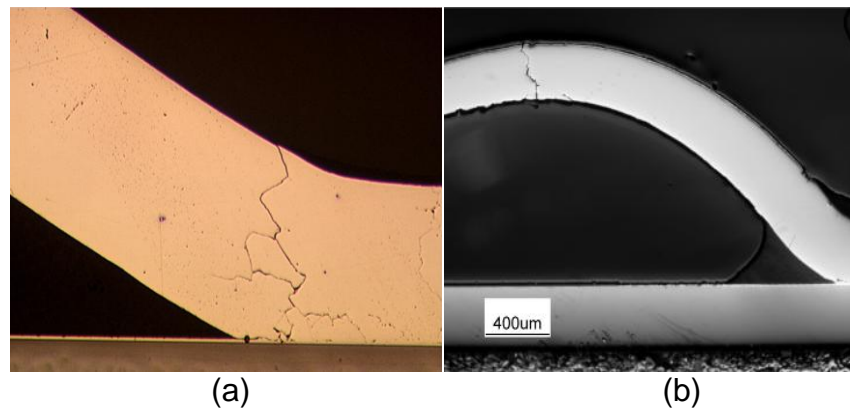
(a) Wire bond heel crack (b) loop arch crack
